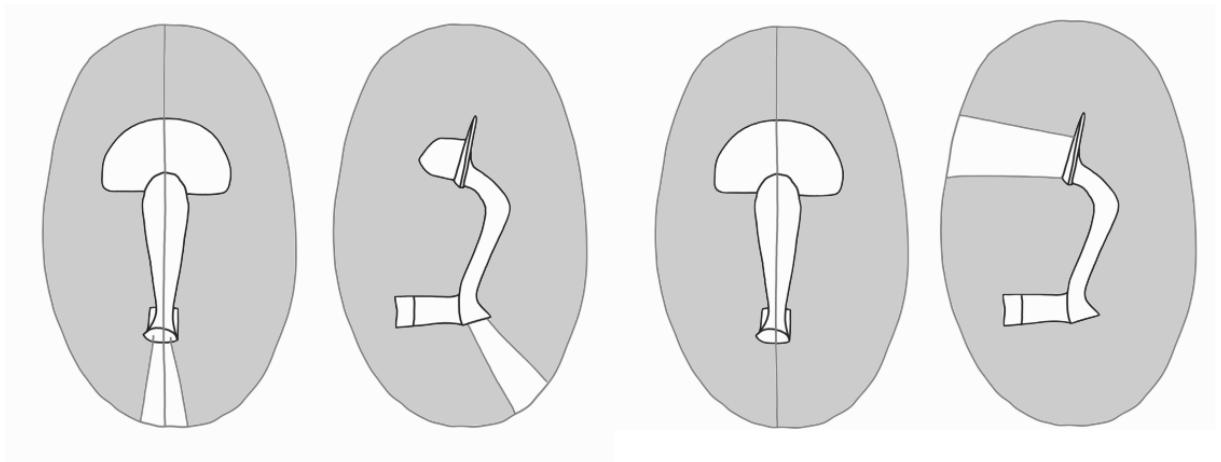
Illustration of brooches in the casting moulds (author: M. Grňová)
